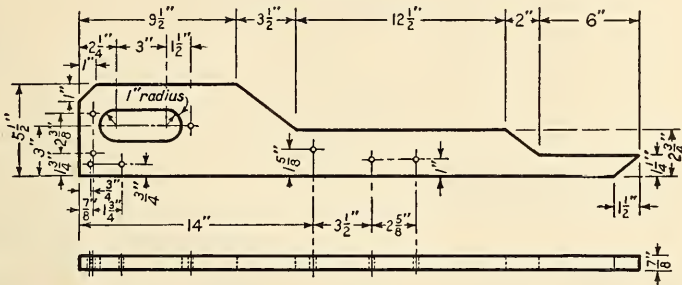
Extension divider chain board, Massey-Harris corn binder
